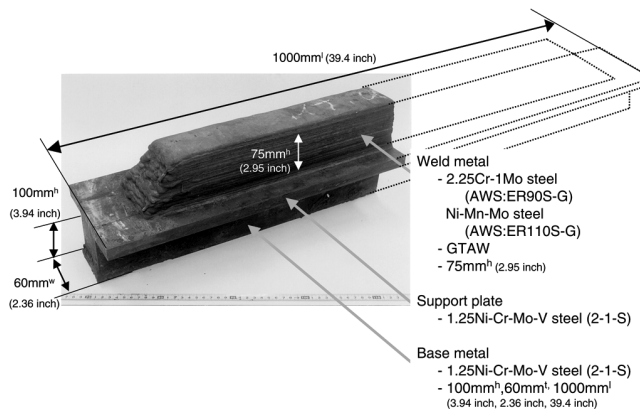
Appearance of Welded Test Piece in Laboratory Scale Test.
